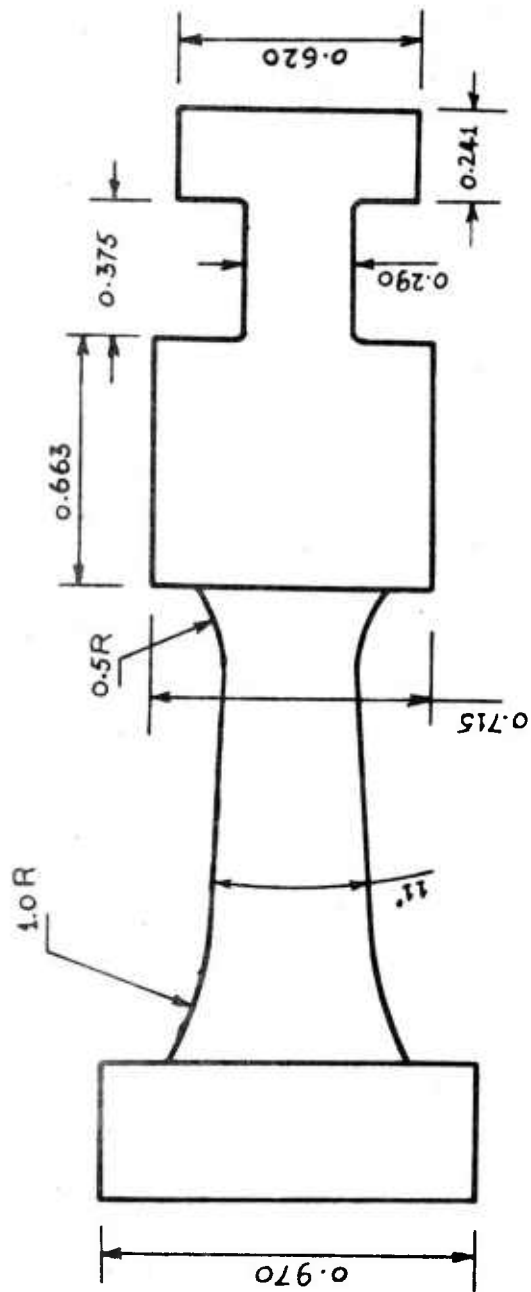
Dimensioned preform drawing for prototype forging of the part.
